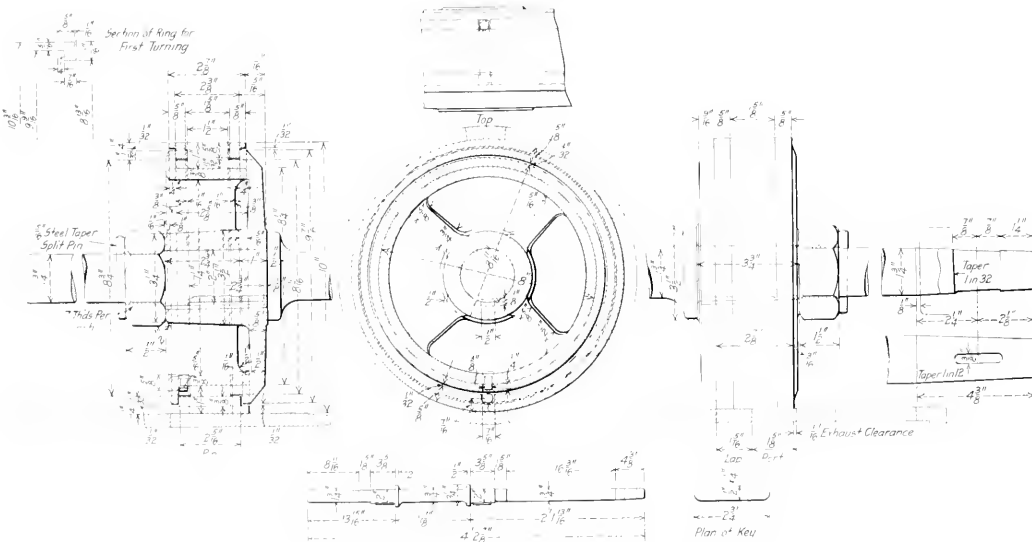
Piston Valve and Valve Rod for 4-6-4 Type Locomotive
